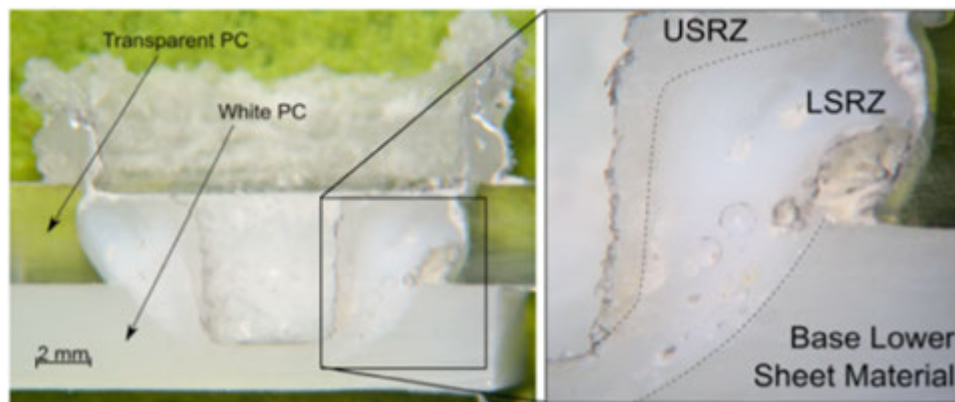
Cross-section of friction stir spot welded polycarbonate sheets. Reproduced from Lambiase, F., Paoletti, A., Di Ilio, A., 2015. Mechanical behaviour of friction stir spot welds of polycarbonate sheets. *International Journal of Advanced Manufacturing Technology* 80 (1–4), 301–314.
